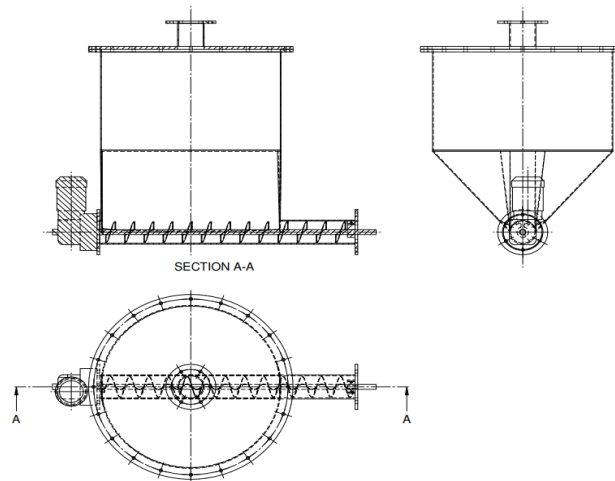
Fixed horizontal screw-feeder with a 4 inch horizontal feed flange
